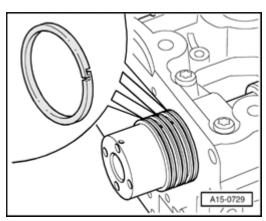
Checking Whether Piston Rings At Camshafts Are Installed Courtesy of VOLKSWAGEN UNITED STATES, INC.
